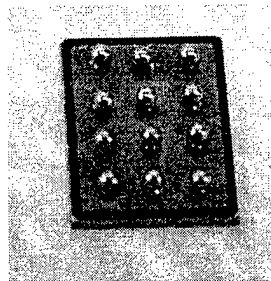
Solder-bump interconnection of power device.
